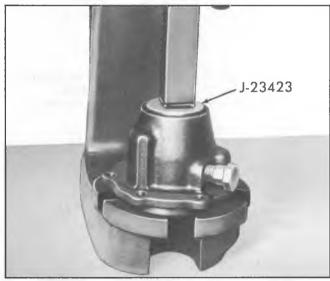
D-Installing Rear Output Shaft Rear Bearing Cup
